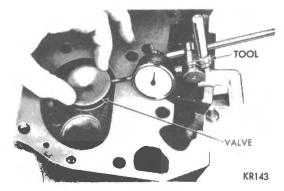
Measuring Guide Wear Using Tool C-3339 (Typical)
